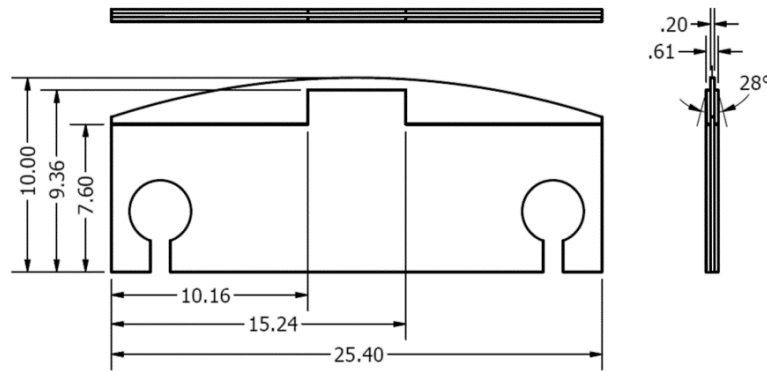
EDM electrode geometry for the 1.4 mm x 21.2 mm notch geometry for the 4 in. and 6 in. wide, flat plate specimens (units in mm).
